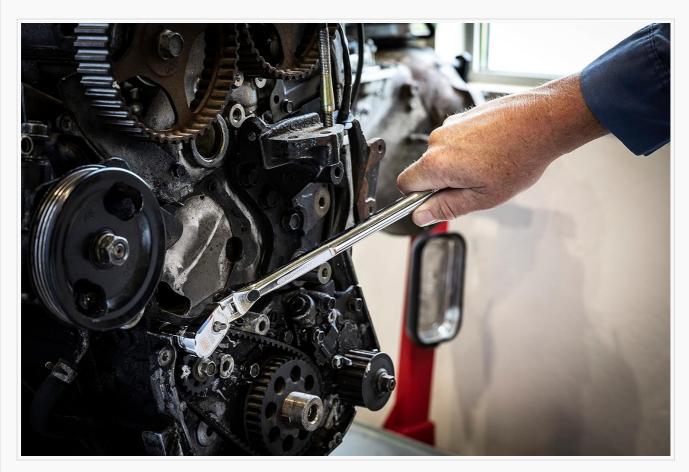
The longer GEARWRENCH 120XP ratchet being used to access a fastener in an engine compartment, demonstrating the utility of the flexing head.
